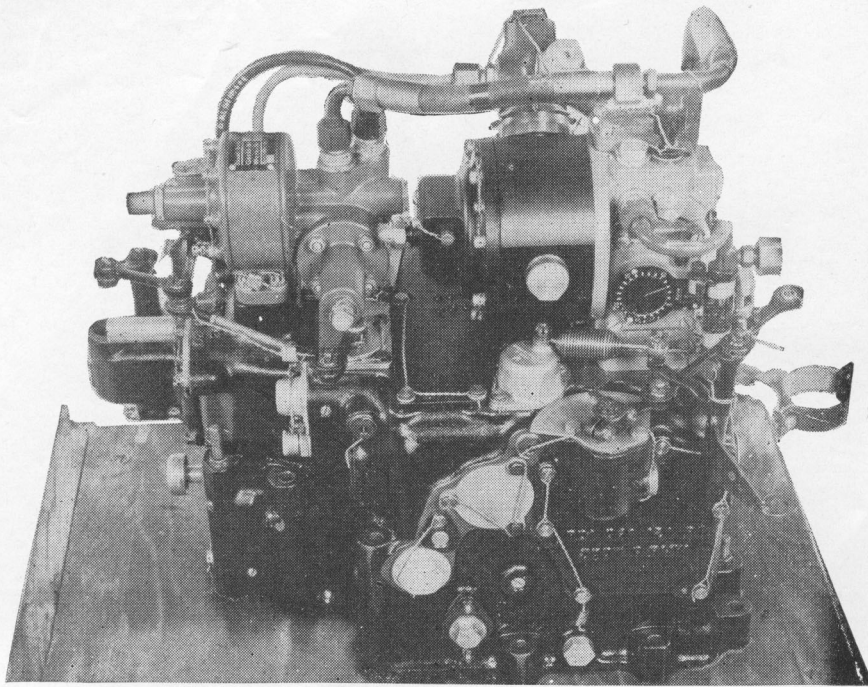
Here is the Kommandgerat or "brain box." Located just ahead of the engine mount ring, it is connected to the throttle linkage. When the pilot moves the throttle lever, this hydraulic-electric unit automatically adjusts fuel flow, fuel mixture, propeller pitch setting, ignition, and, at proper altitude, cuts in the second stage of the supercharger. It is 16 in. high, 16 in. long, and 12 in. wide.
